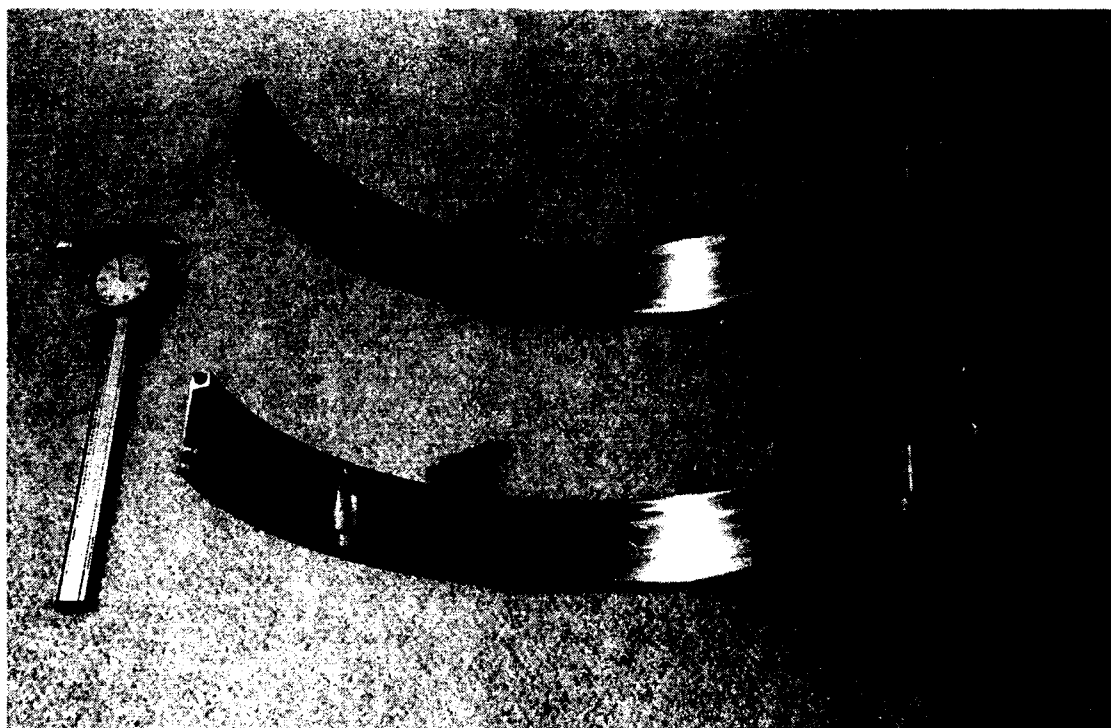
Split wedge bands used for clamping together components of the housing assembly.
